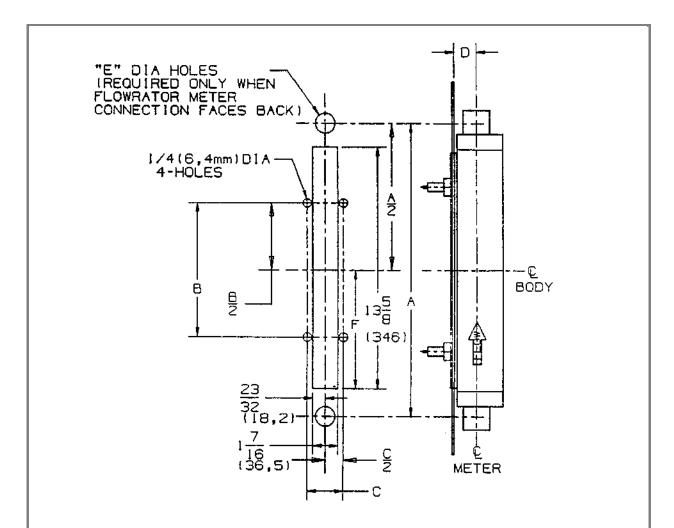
OUTLINE DIMENSIONS FOR FRONT PANEL MOUNTING
